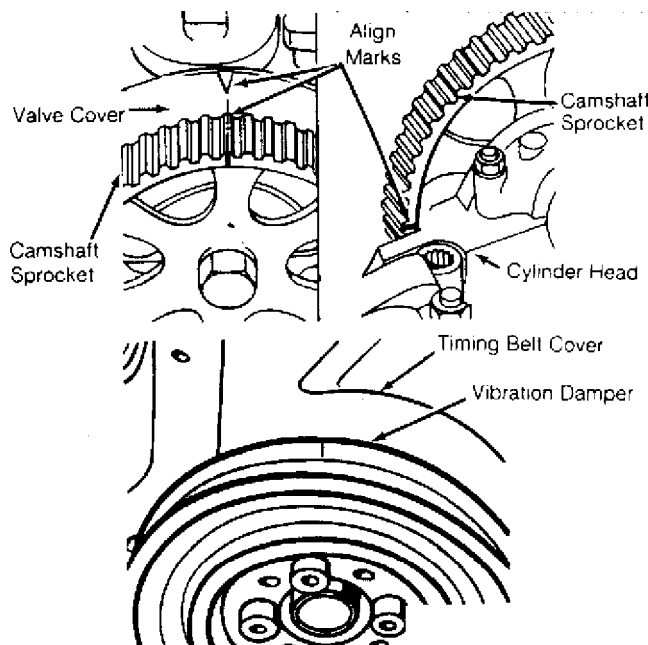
Aligning 2.0L Camshaft & Crankshaft Pulley Timing Marks (16-Valve)
